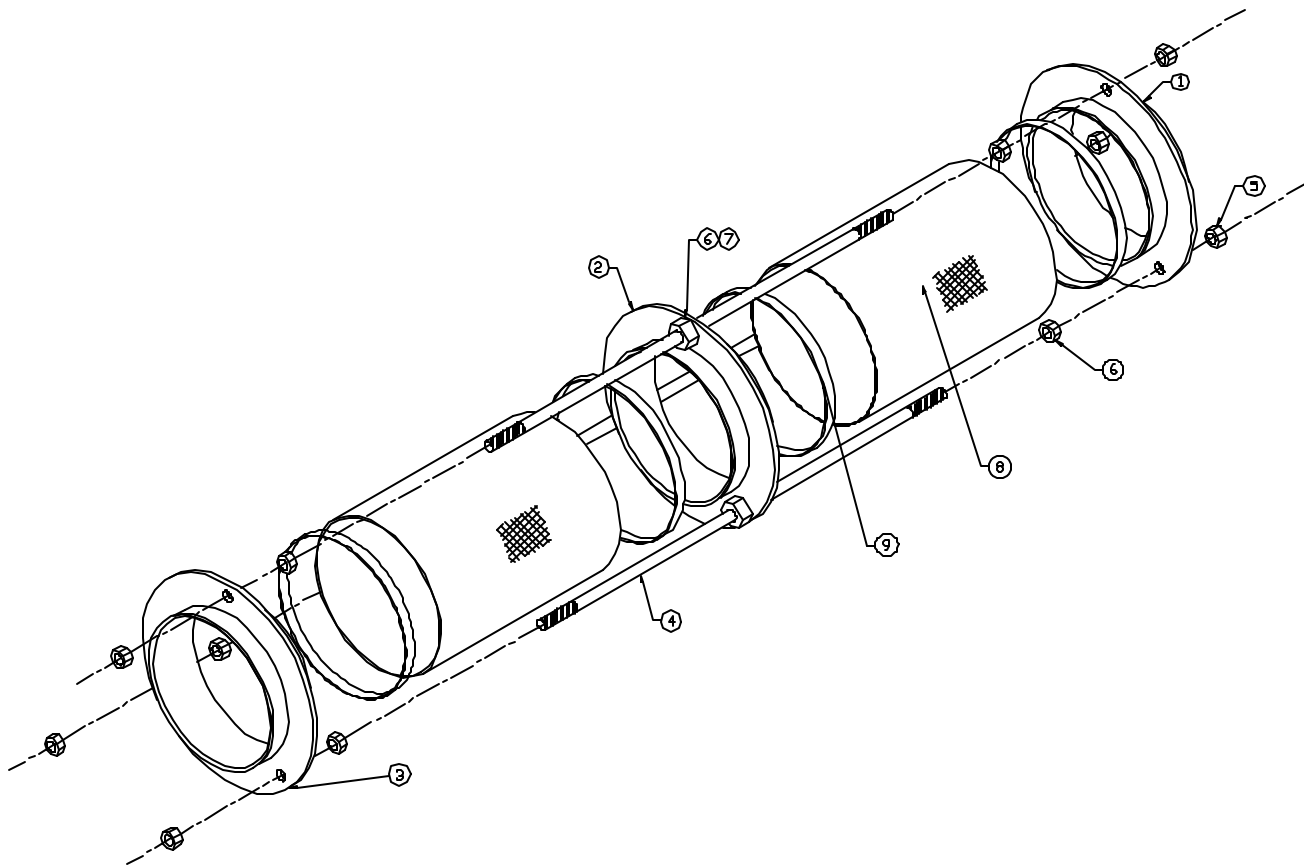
RS 700/700S, RS 1500 Screen Frame Assembly Exploded View
